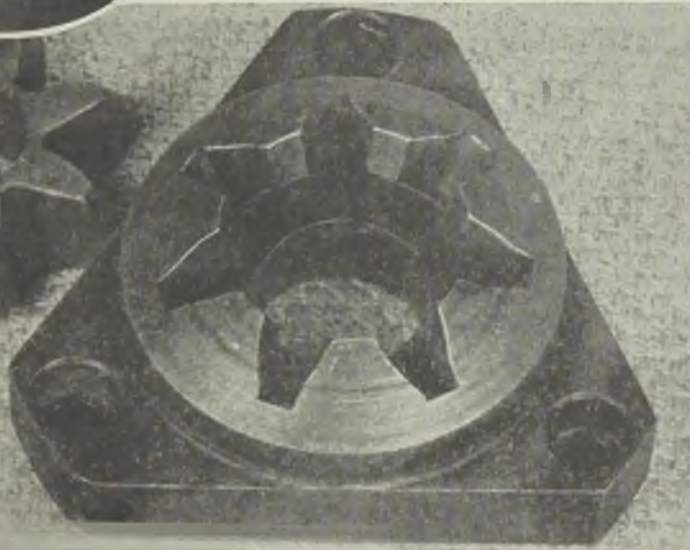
(Below)—In the machining operations which follow forging and coining, the pinion is held and centered in this fixture which duplicates the coining die form
